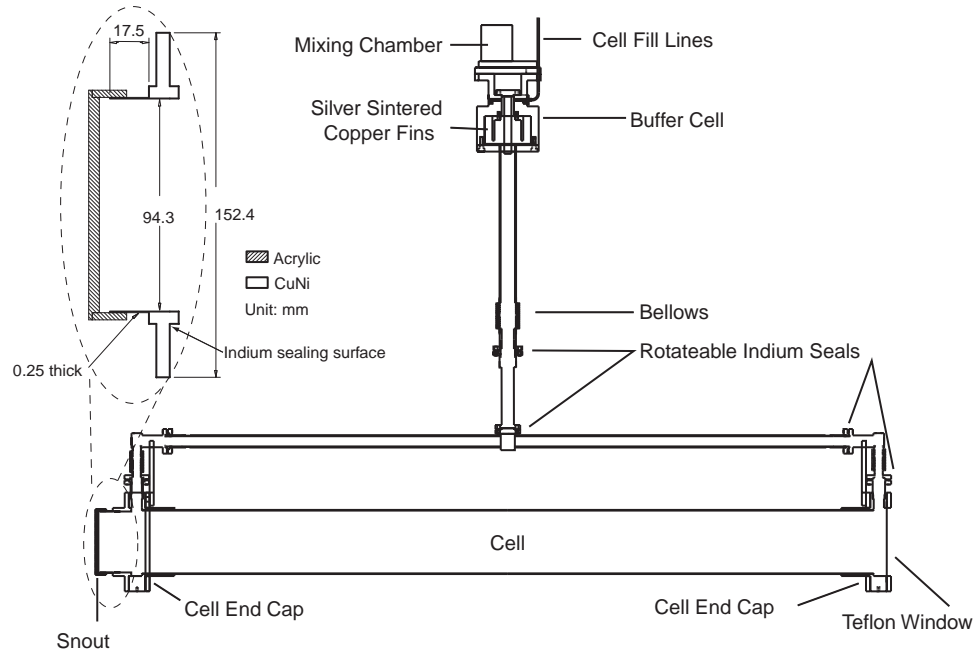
A drawing of the experimental cell, its superfluid heatlink to the mixing chamber and the buffer cell. The design of the snout is also shown in details.
